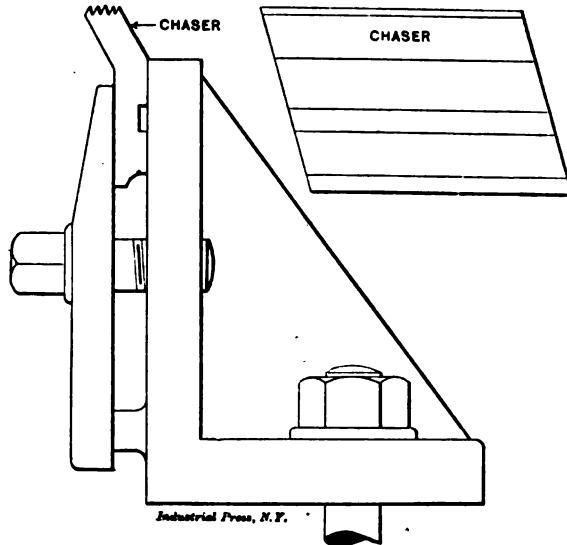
Fixture for Hobbing Chaser for Pratt & Whitney Thread Tool Holder.
